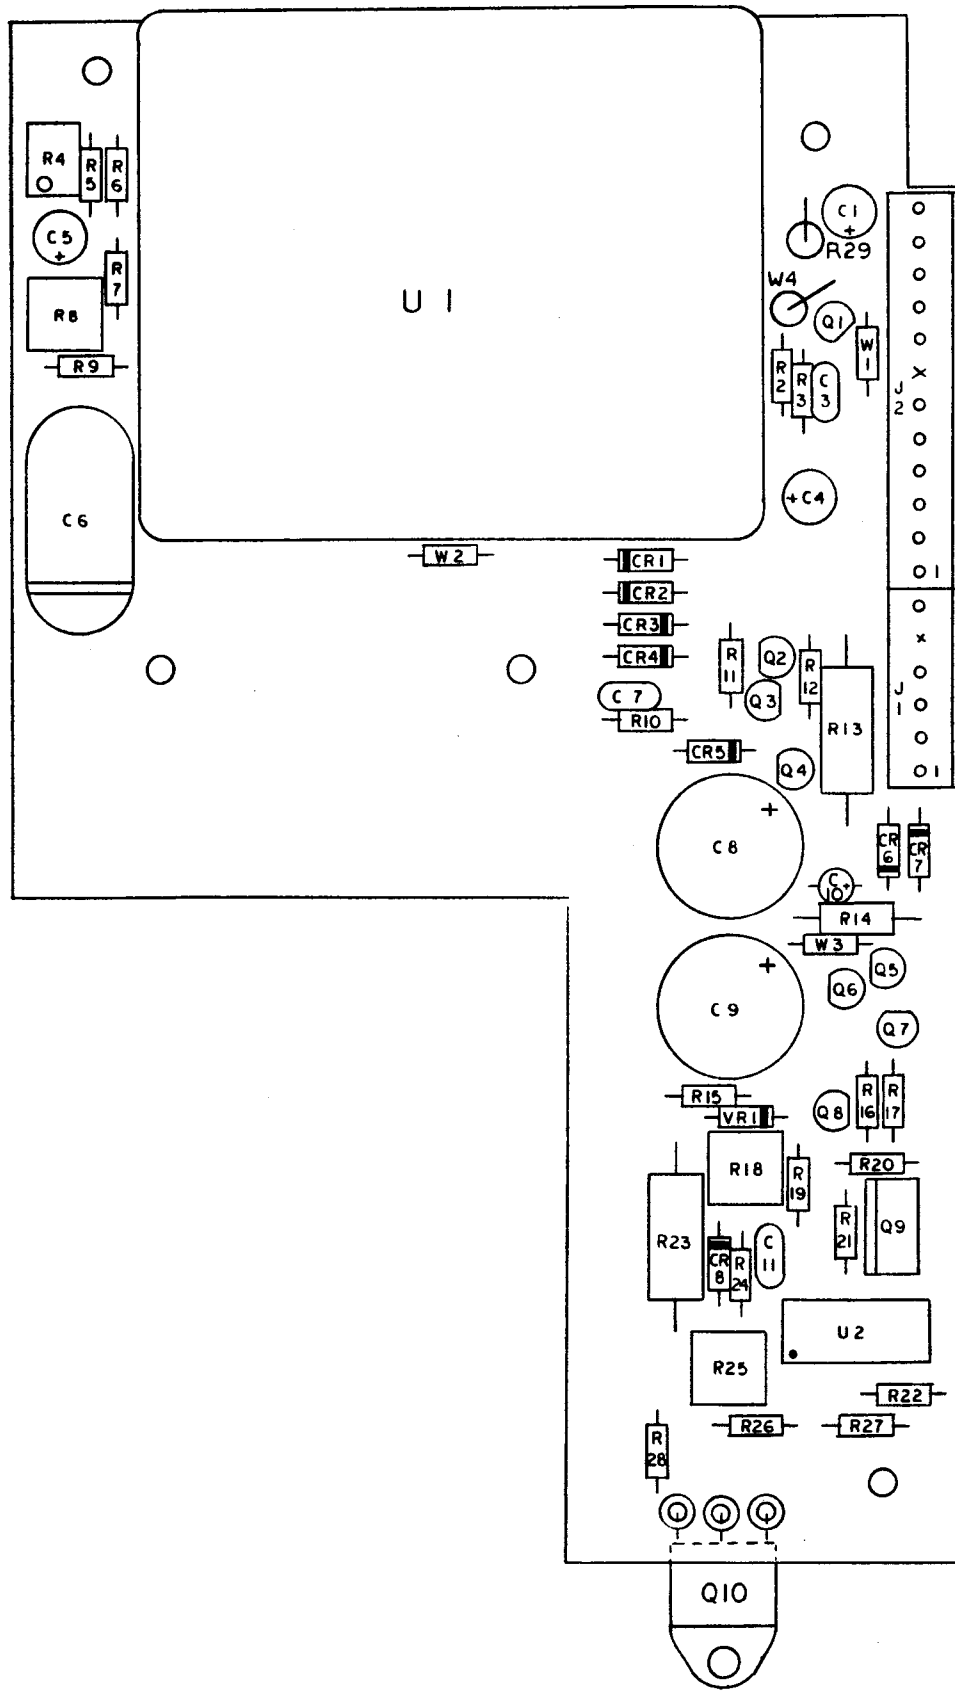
ASSEMBLY DRAWING - AS OSCILLATOR & POWER SUPPLY
